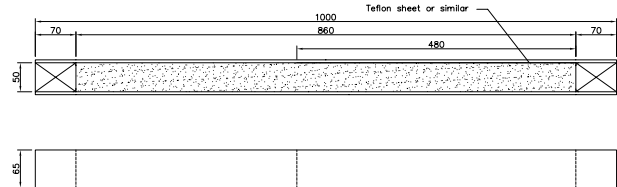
geometry of damage tolerance specimen, dimensions in mm.
